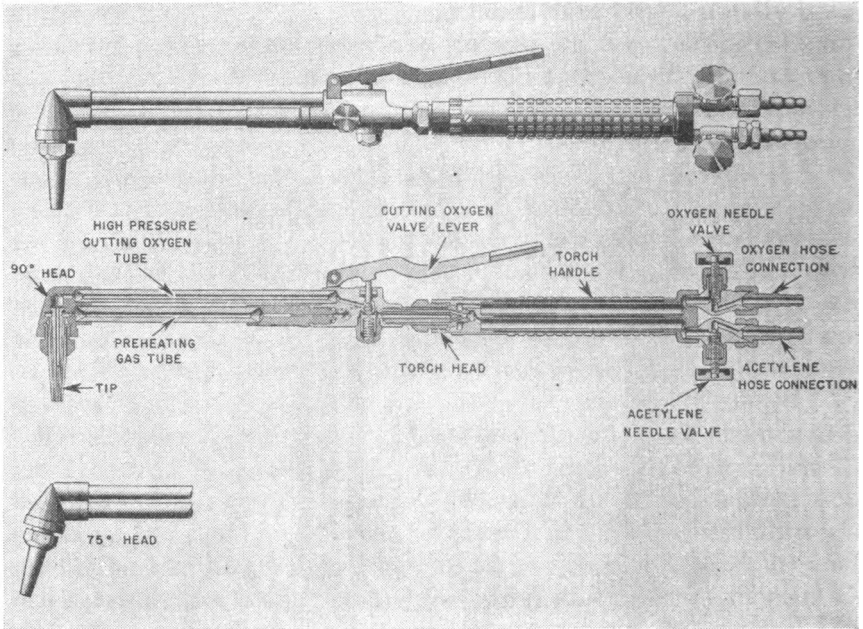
Cutting attachment for a welding blowpipe.
